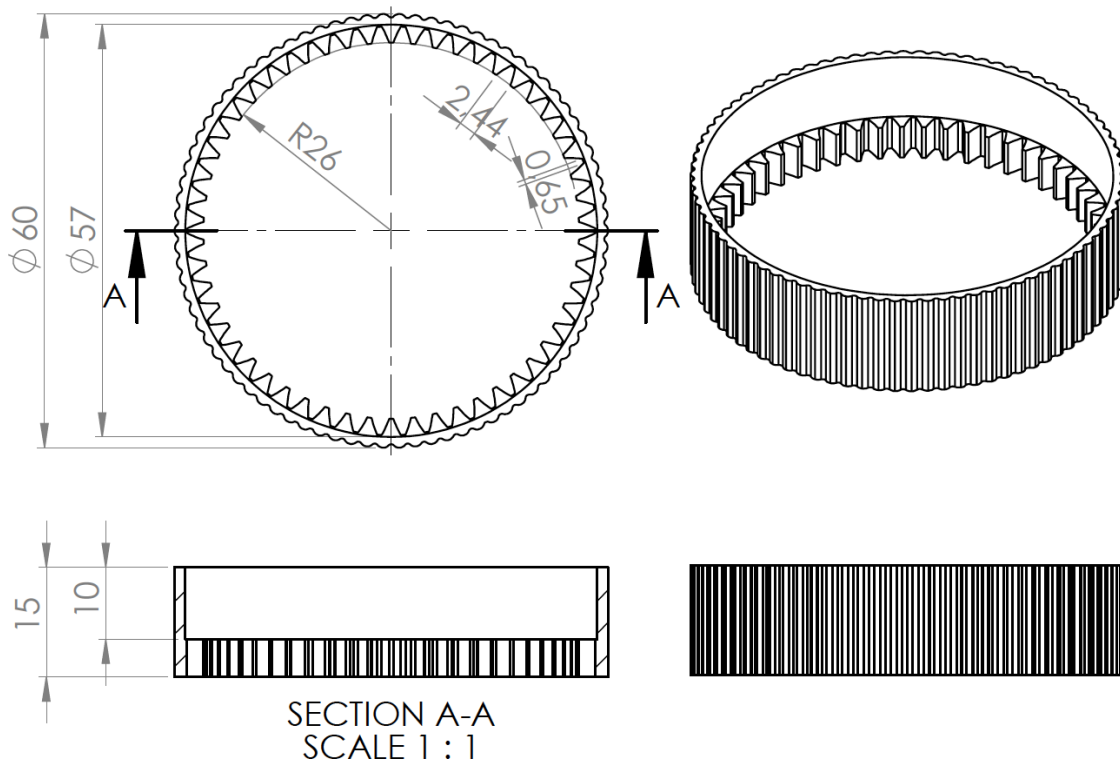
Selection of component views and dimensions (mm), C9 - Internal gear
